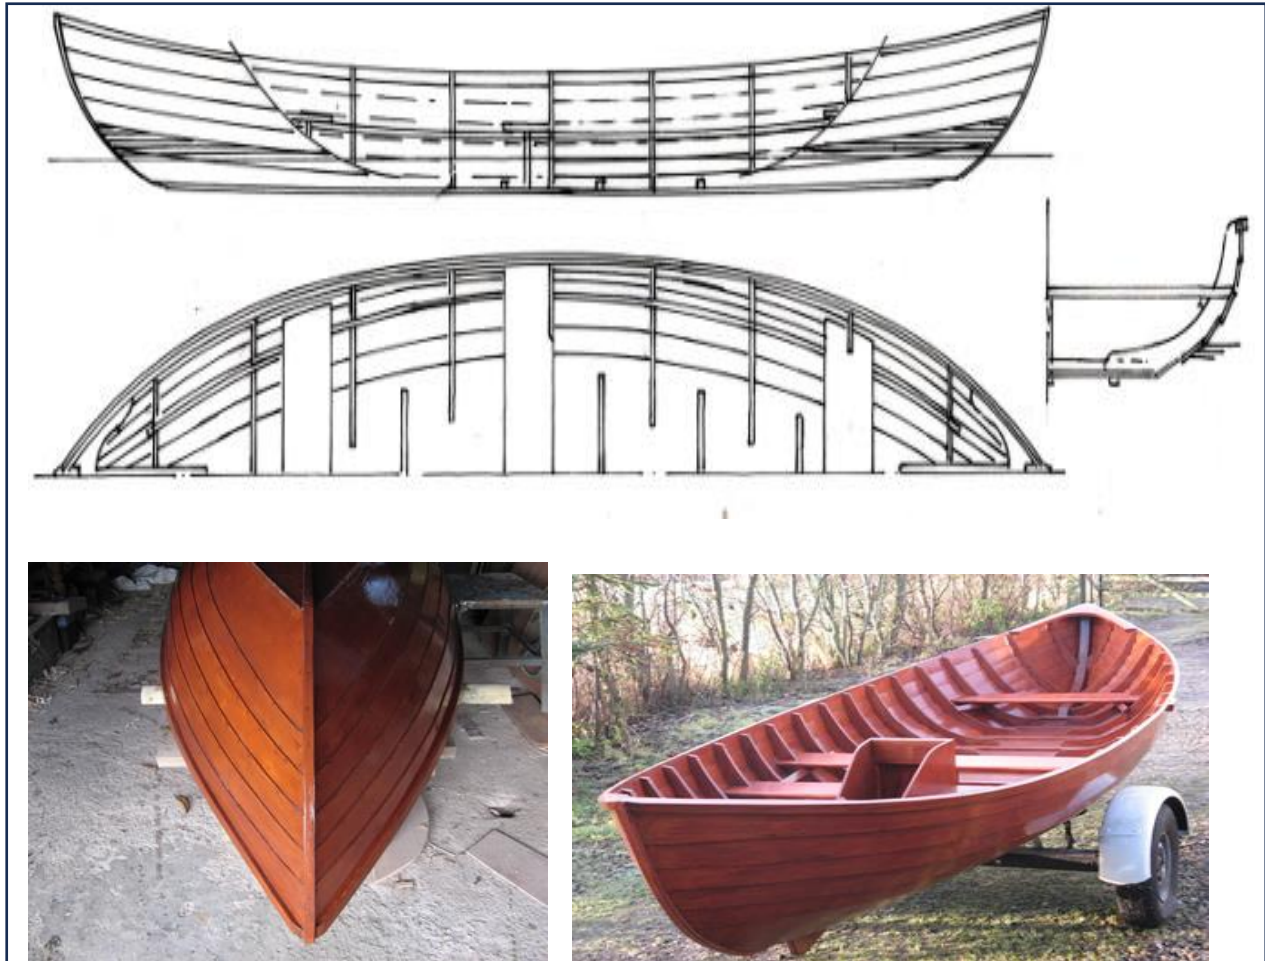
Plan of a clinker boat drawn using AutoCAD and boats produced from the plan
